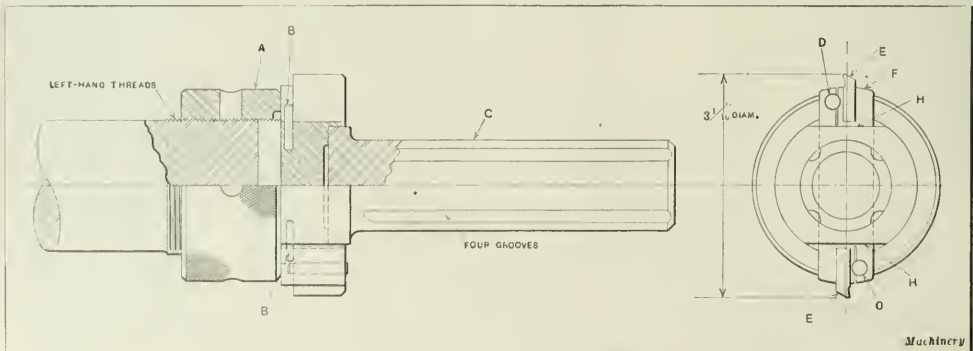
Boring-bar for boring Crankshaft Hole in Connecting-rods
